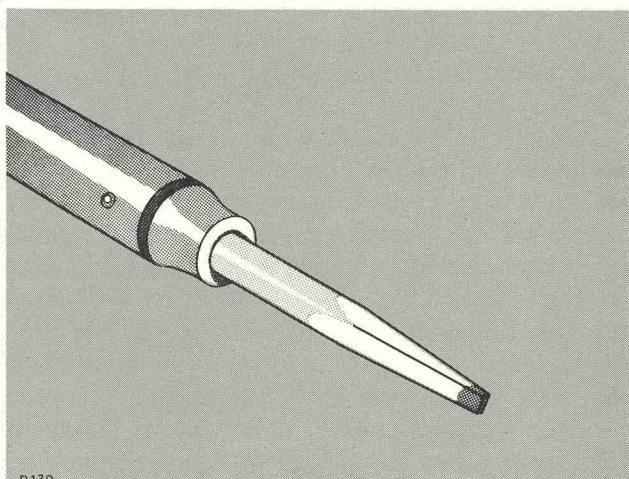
Soldering iron tip properly shaped and tinned.
